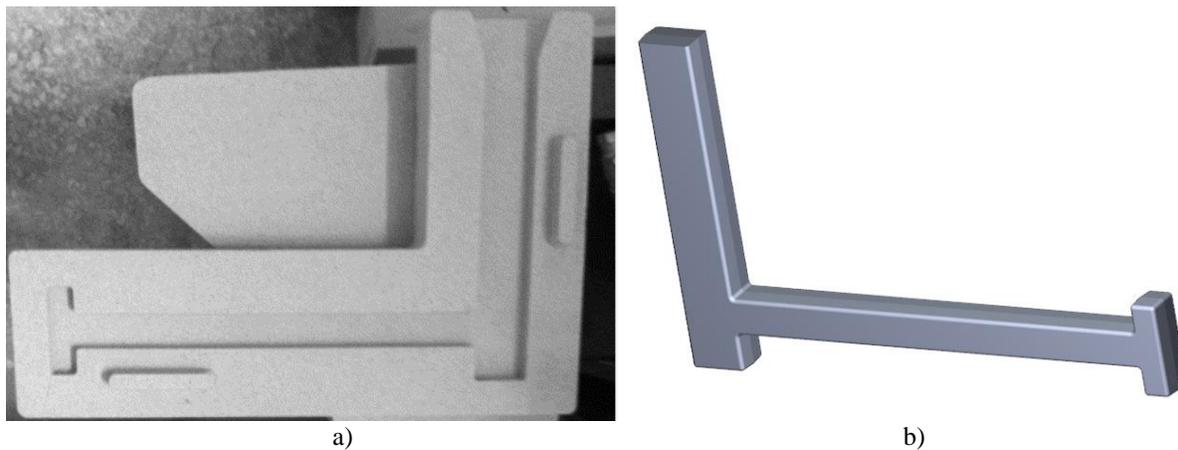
a) Sand mould used in the castings, b) dimension of the cast part that is produced
